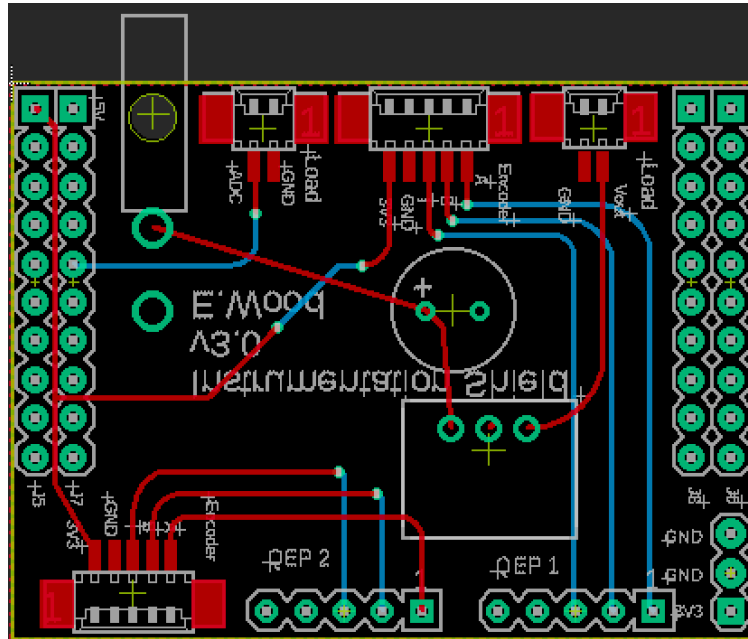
Instrumentation Breakout Board Eagle CAD board schematic
